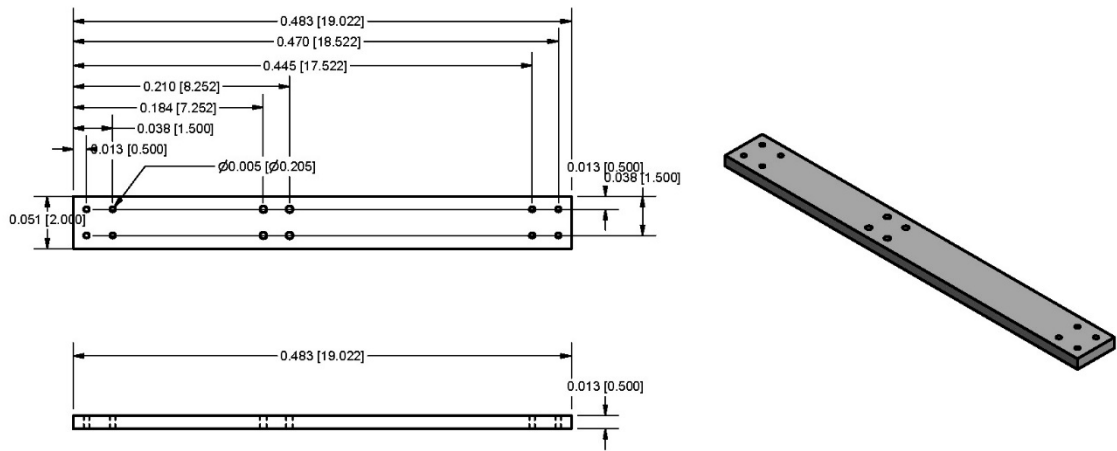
Brace on one end of the top assembly to join two linear rails together.
